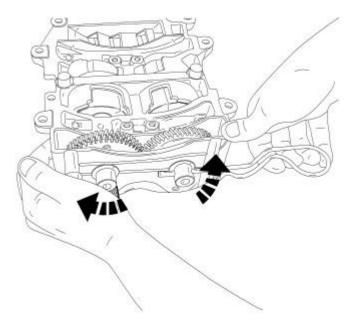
BALANCE SHAFT TIMING TOOL Courtesy of CHRYSLER LLC
